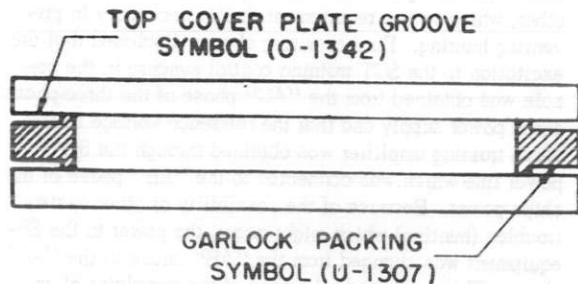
Cross-sectional view showing Garlock Packing Ring properly installed with wide dimension against bottom of groove in top cover plate.
